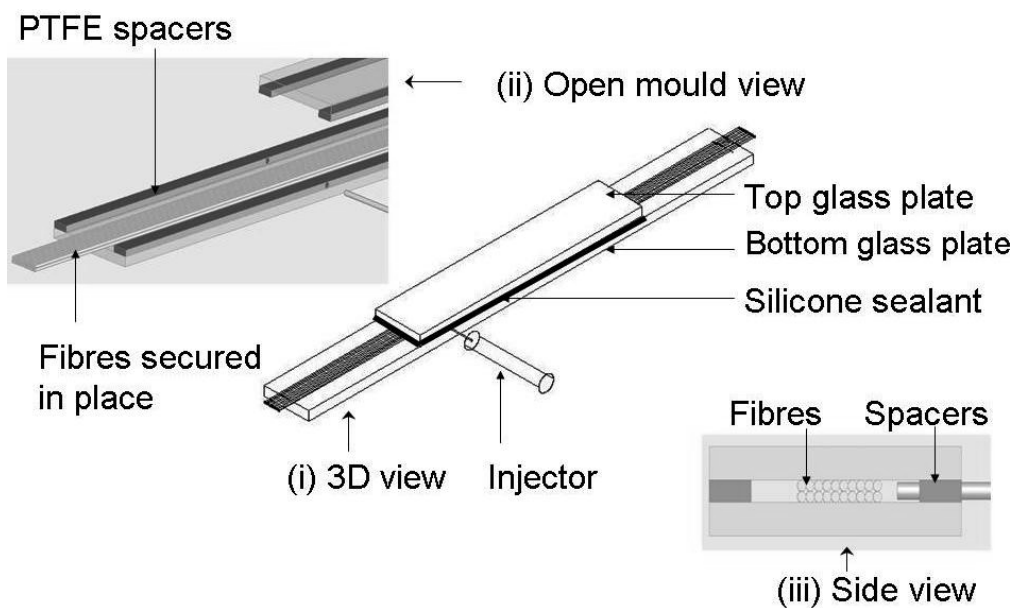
Schematic illustration of the manufacturing process for the production of void-free composites: (i) 3-D view of the mould and sample; (ii) view of the open mould assembly showing the fibres and PTFE spacers; (iii) cross-sectional view of the mould assembly
